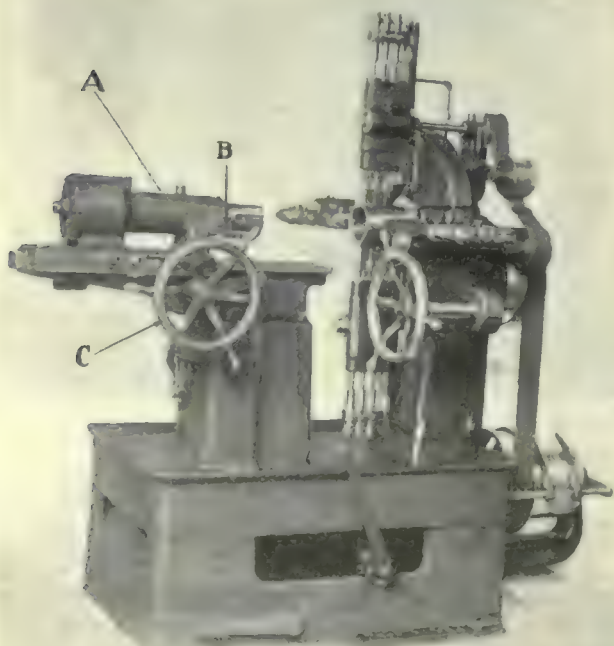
OPERATING SIDE OF MULTIPLE DRILLING MACHINE.
